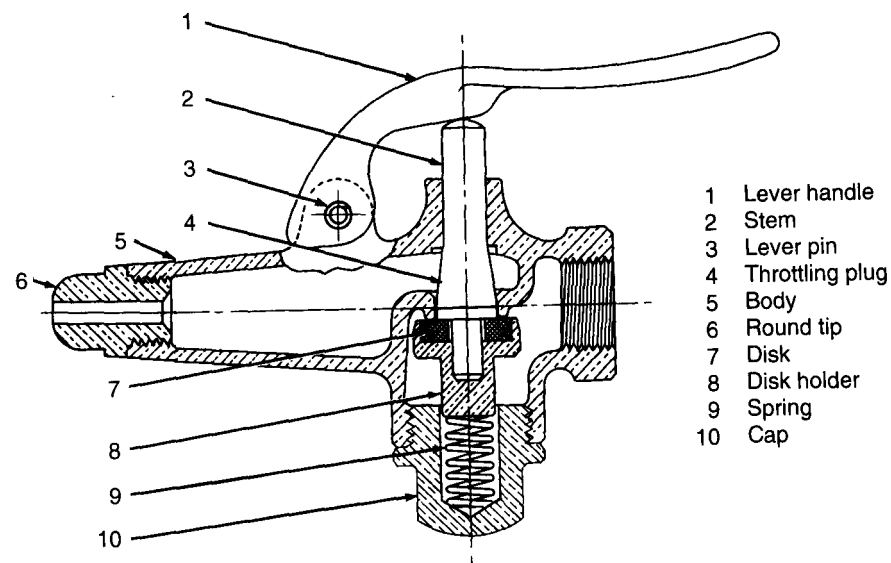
Lever-operated globe valve. Courtesy Crane Company.
